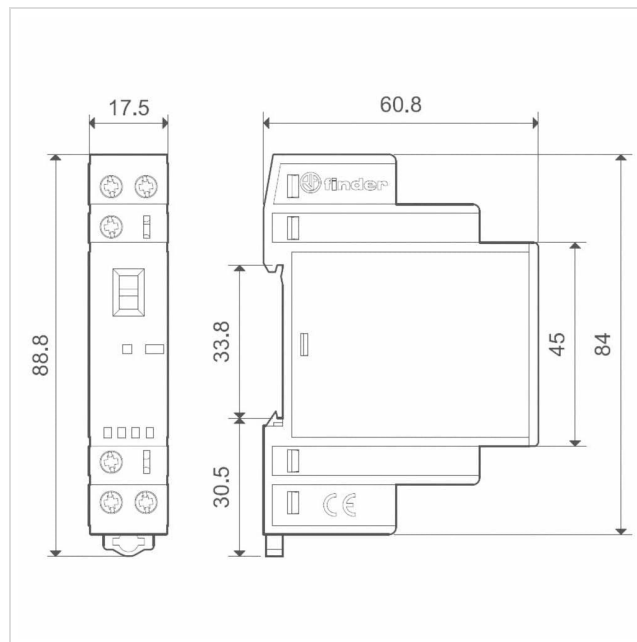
Dimensional Drawing. This technical drawing illustrates the precise dimensions of the Finder 22.32.0.024.4320 modular contactor in millimeters, including height, width, and depth, crucial for installation planning and panel integration.
